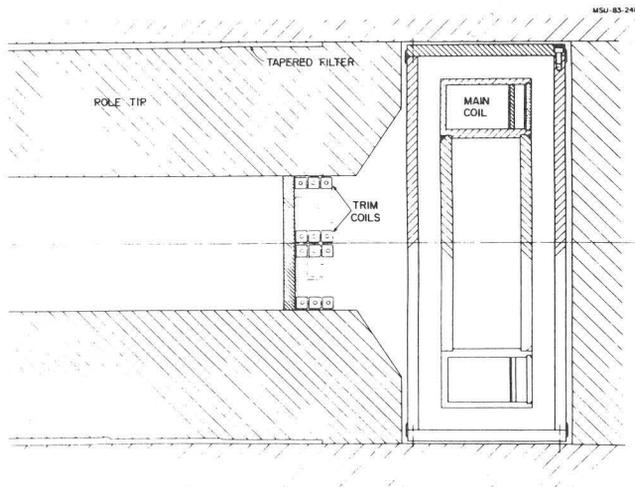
Enlarged view of a section of the dipole of the S800 illustrating the beam vacuum chamber, pole tips, cryostat, coils, and coil bobbin.
